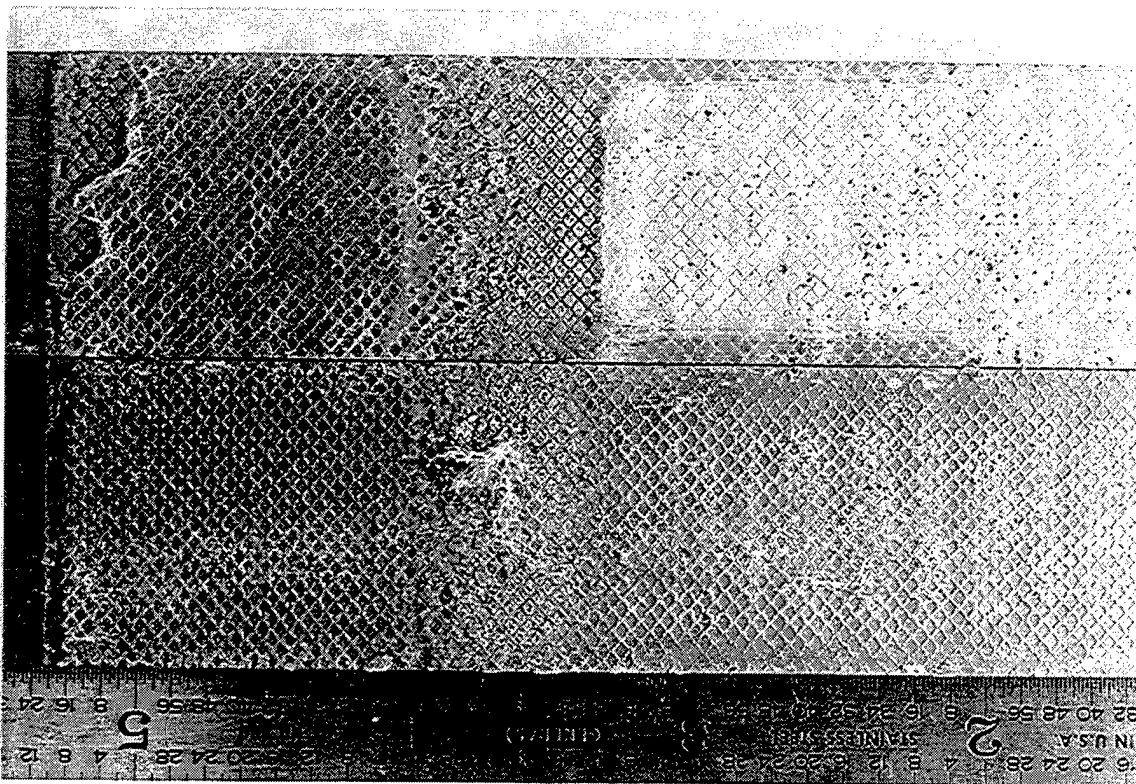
Photograph Of Wedge Specimen Fracture Surface Of Grit Blasted IBED Treated, Oven Dried And Primed Aluminum Alloy 2024-T3.
